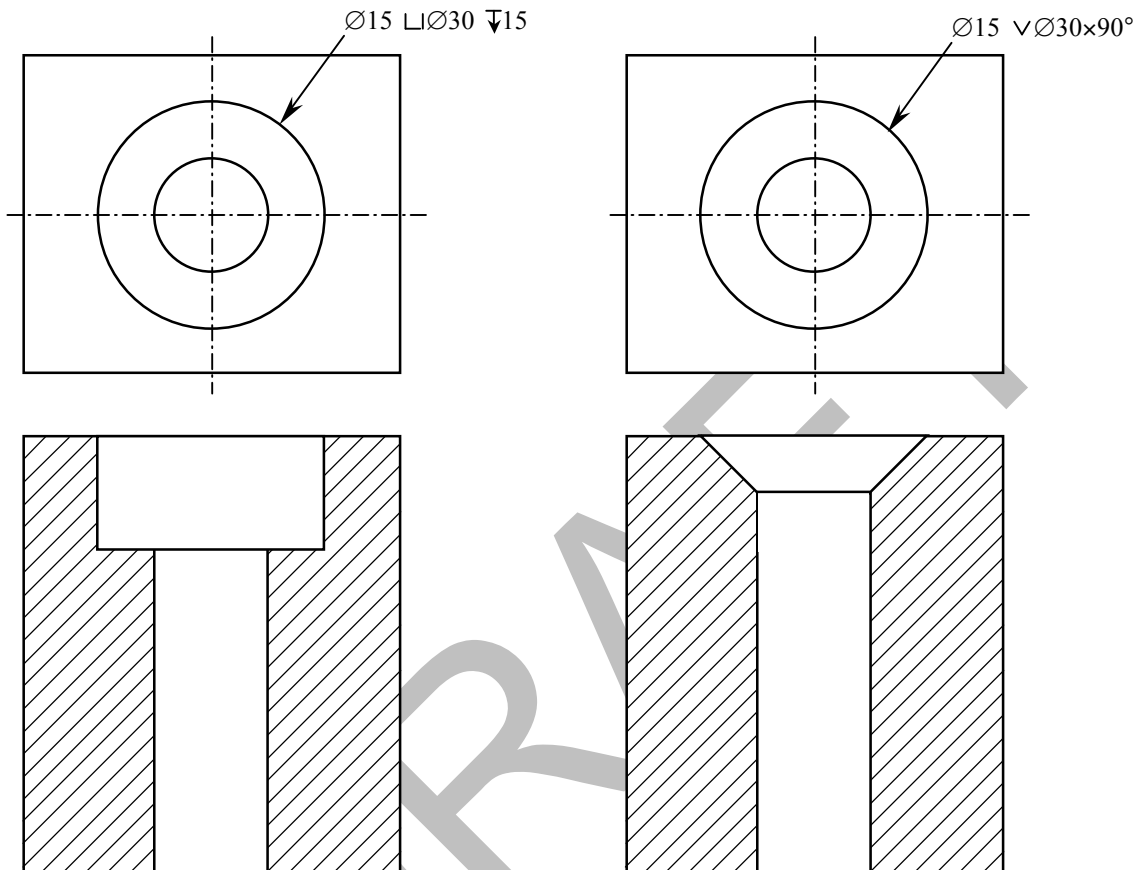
Sectioned views of a counter bore hole and countersunk hole. Dimensioning standards for them are shown.
